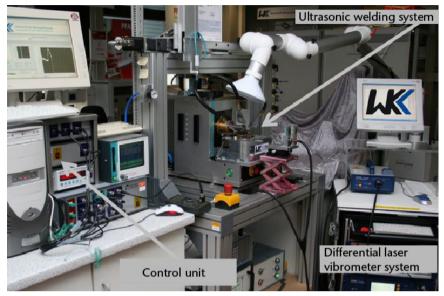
Ultrasonic welding system with differential laser vibrometer.
